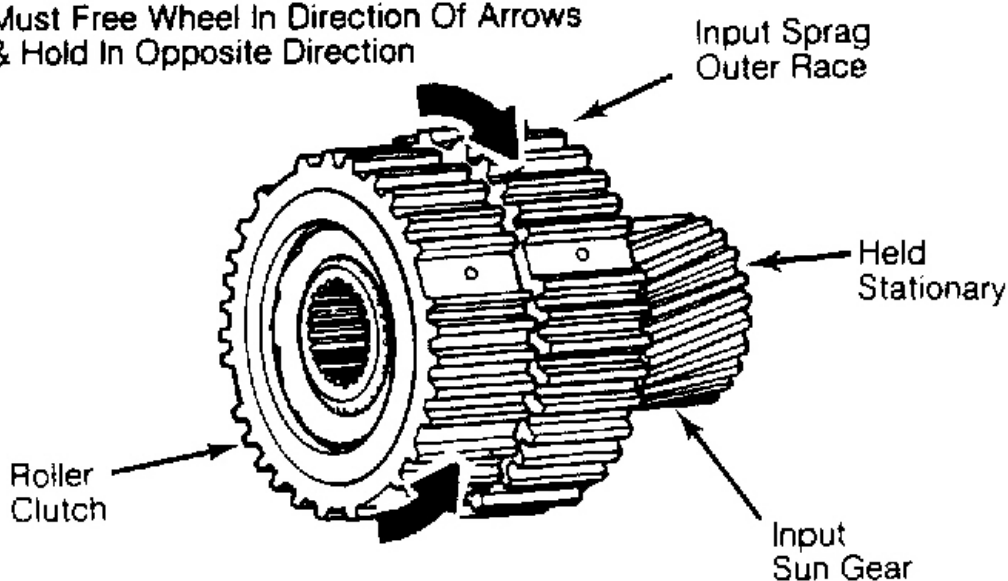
Checking Rotation of Input Sprag & 3rd Roller Clutch
